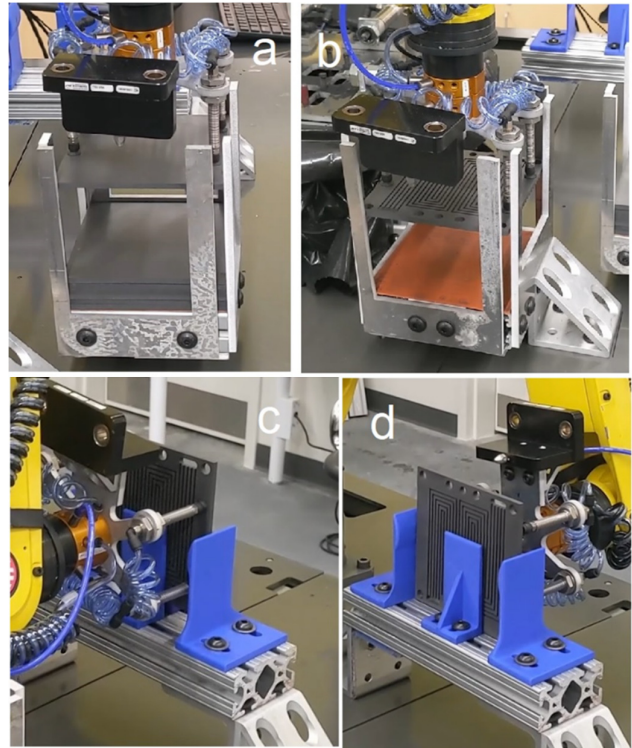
Fixtures used in the robotic system. (a) fixture for blank plates shown while the robot picks a plate; (b) fixture for stacking machined plates shown while the robot places a plate. (c-d) fixture for flipping the plates. The robot flips a plate by placing it in the fixture while holding it from one side (c) and picking it from the other side (d)
